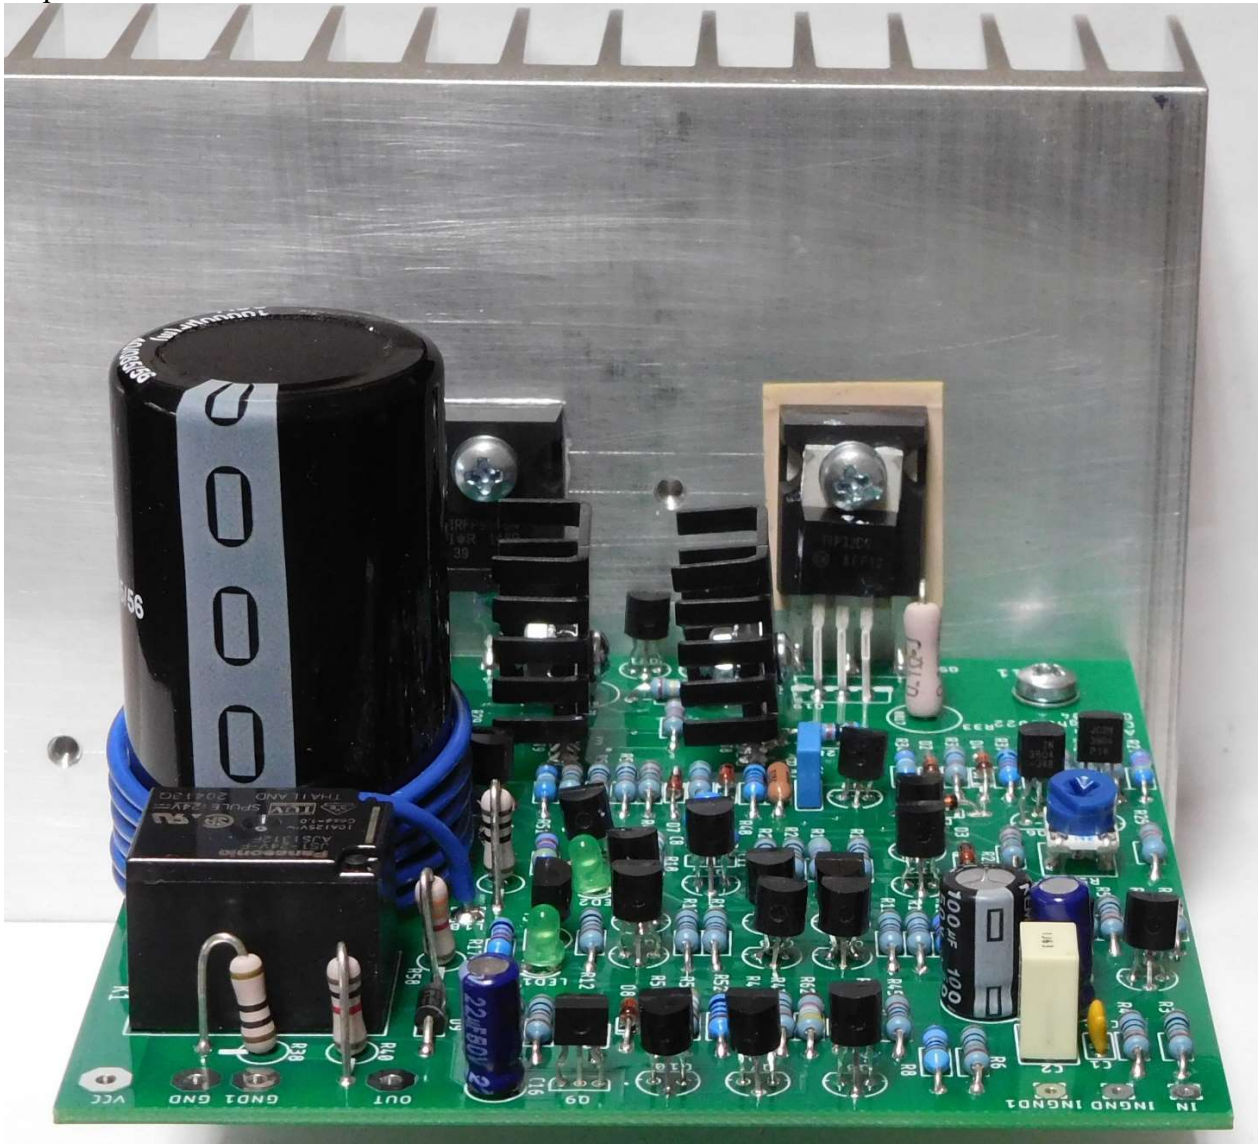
Q5 with 6-32x1/2" mounting screw and insulator
